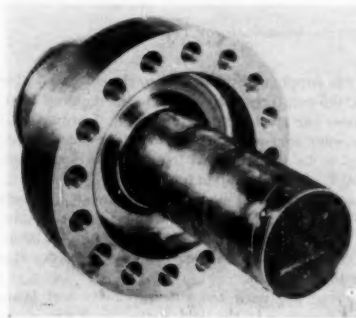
SOCKET FLANGE OF PRESSURE-SEAL JOINT WITH LINER AND END BAFFLE PLATE ASSEMBLED
